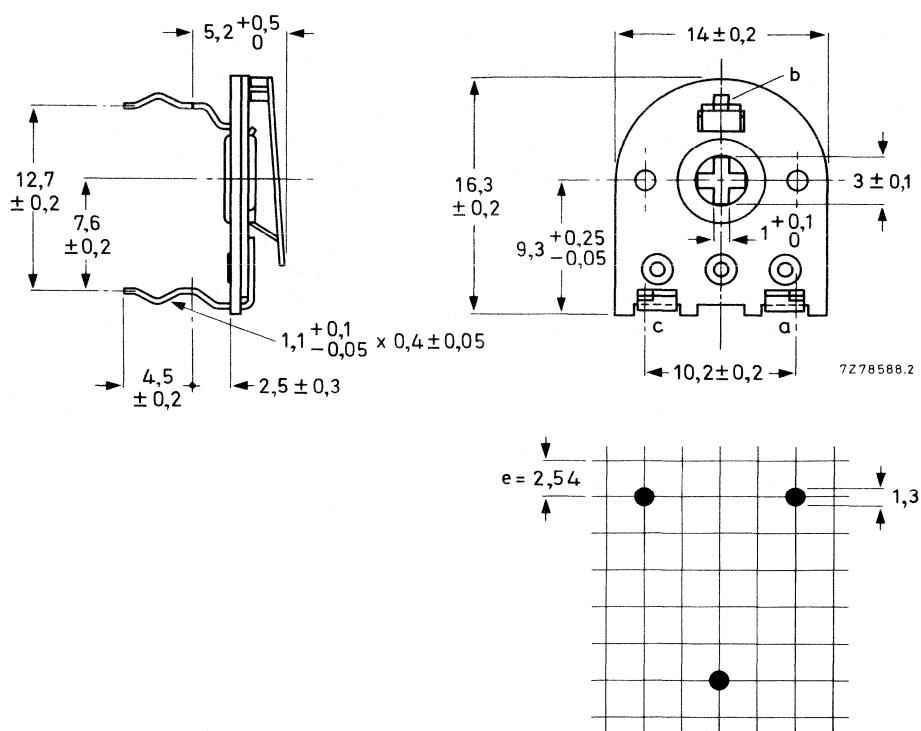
Potentiometer for horizontal mounting, with snap-in printed-wiring pins, 2322 409 033..
